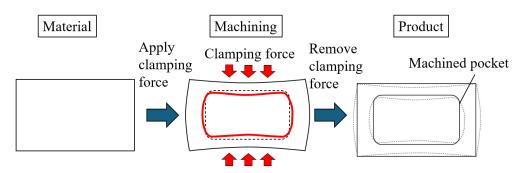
Machining with tool path modified considering workpiece deformation due to vice clamping.
